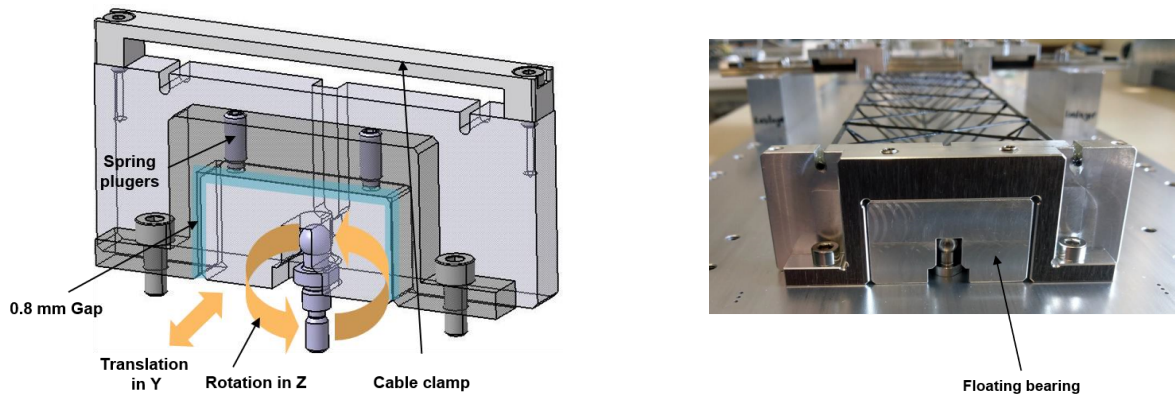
(Left) CAD drawing of the floating bearing with all the components labeled, (Right) Floating bearing holding the edges of the ladder from one side.
